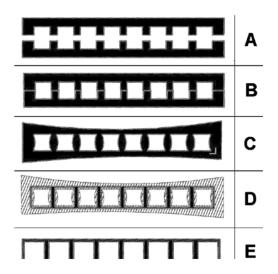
Detailed view of grooves with transversal connection to evacuate gas during Electon Beam welding before HIP
